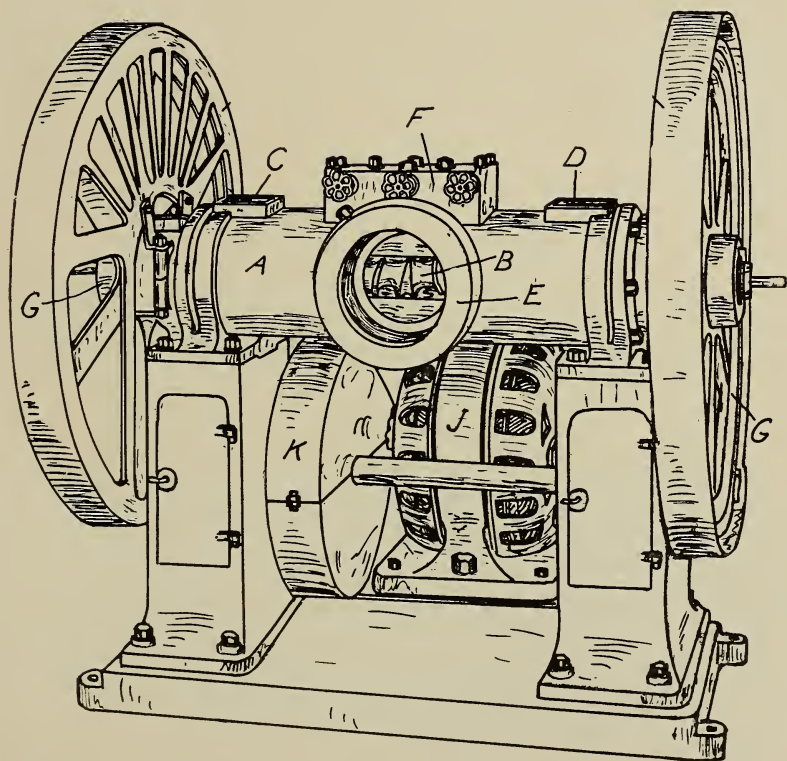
ALLEN DOUBLE TUBING MACHINE.
